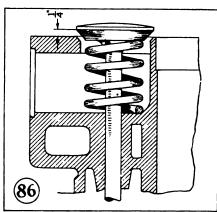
Spring cut off to lift the valve off the seat when grinding
